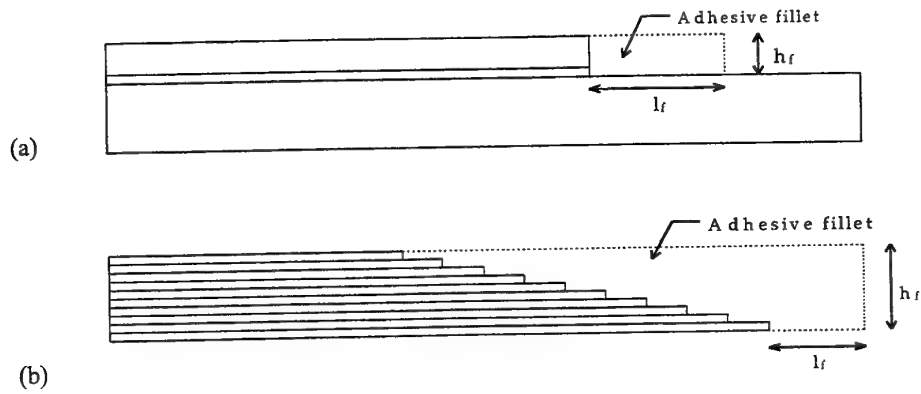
Typical patch geometries with typical rectangular adhesive fillets shown; (a) Plate with single step patch, (b) Typical multiple uniform stepping arrangement of patch.
